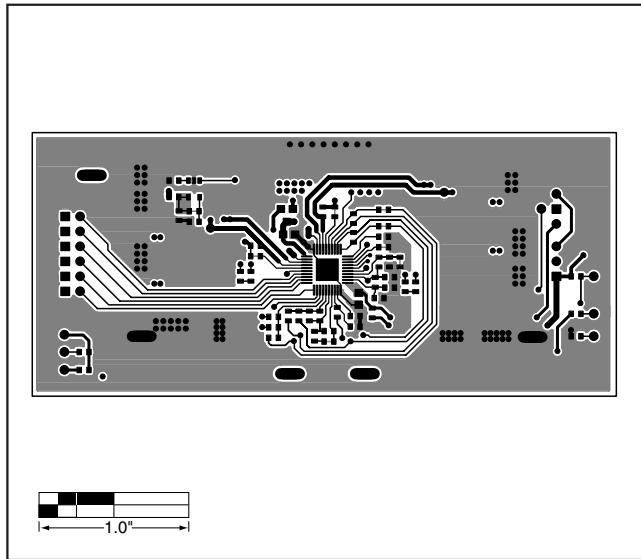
MAX8760 EV Kit PC Board Layout—Solder Side
